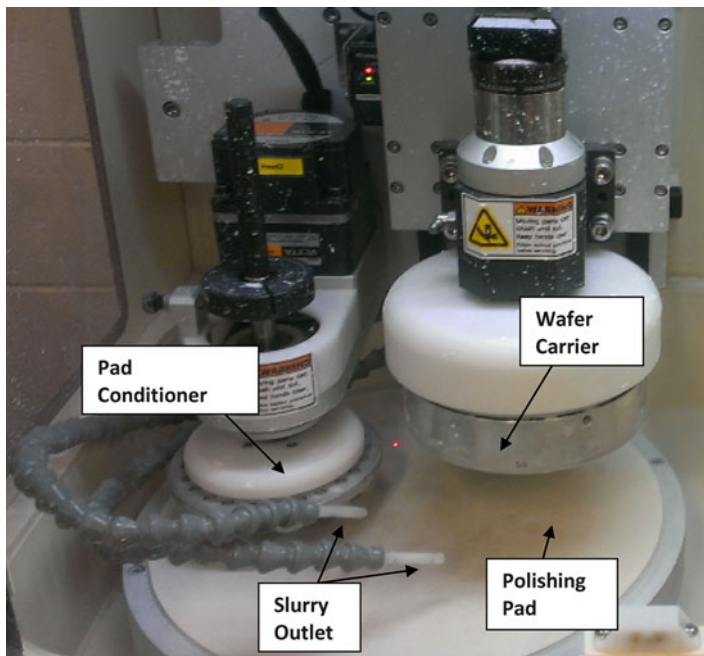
An image of the G&P Poli-300 CMP machine
